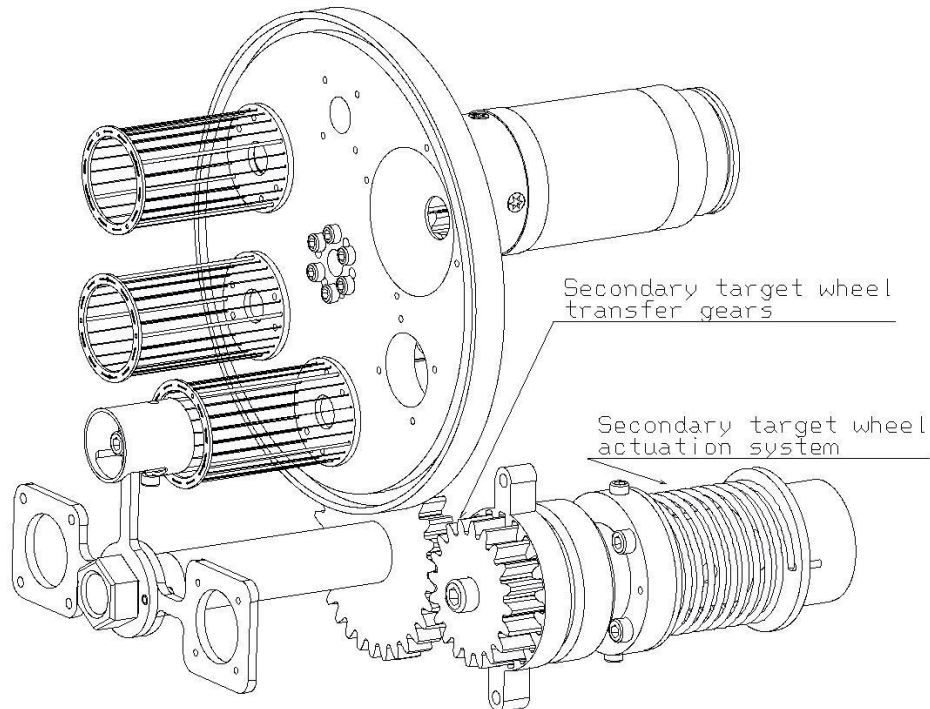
Isometric view of both primary and secondary target wheels with transfer gears and actuators
